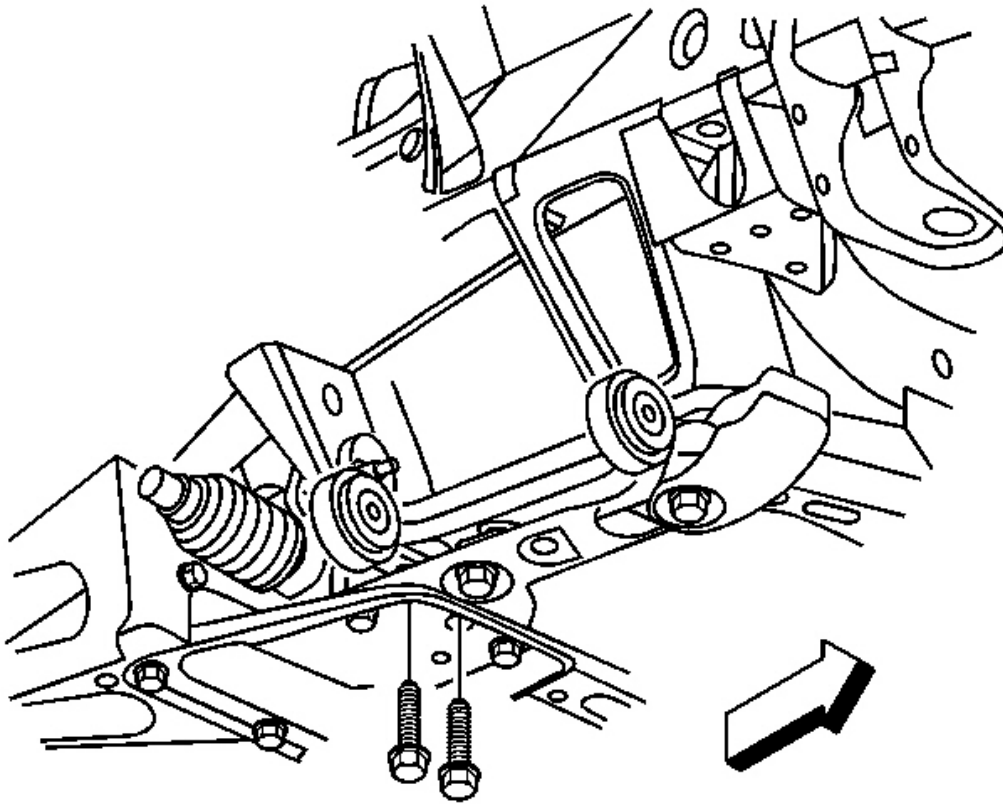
View Of Steering Gear Crossmember Mounting Bolts
